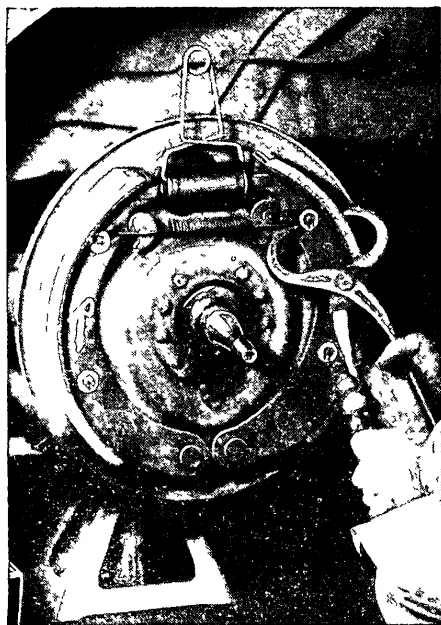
When removing shoes from Bendix and Lockheed brakes, use piston clamp shown to hold pistons in cylinder. The use of the return spring removing and installing pliers are also illustrated
